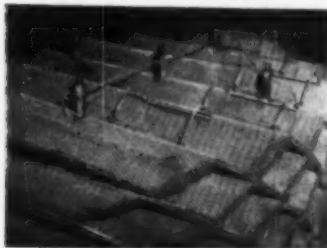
Shop Assembly of Packing for a 4-ft. Diameter Heavy Virgin Gas Oil Stripper.
